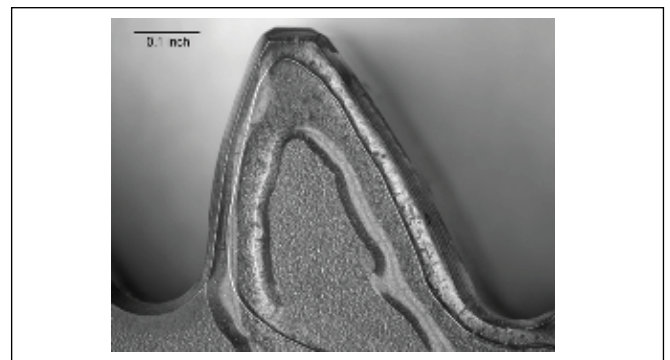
Asymmetric STBF test tooth with crack-wire installed.
